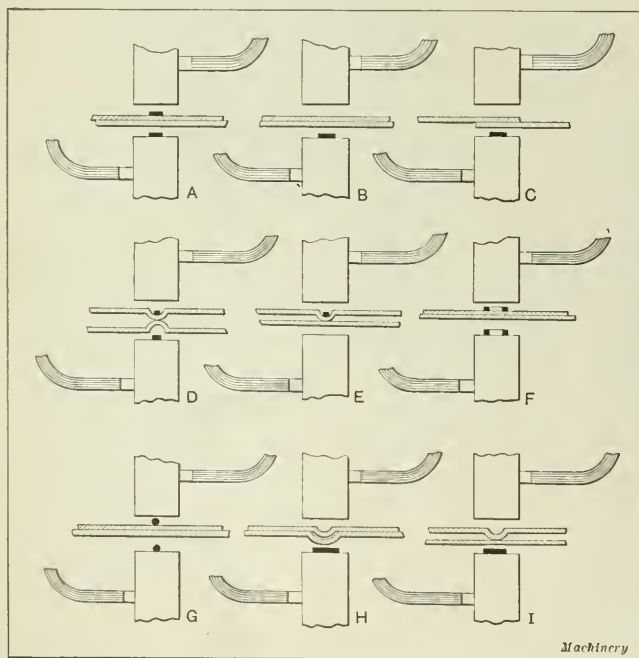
Diagram illustrating Various Processes employed in welding Two Sheets of Steel by means of Buttons
